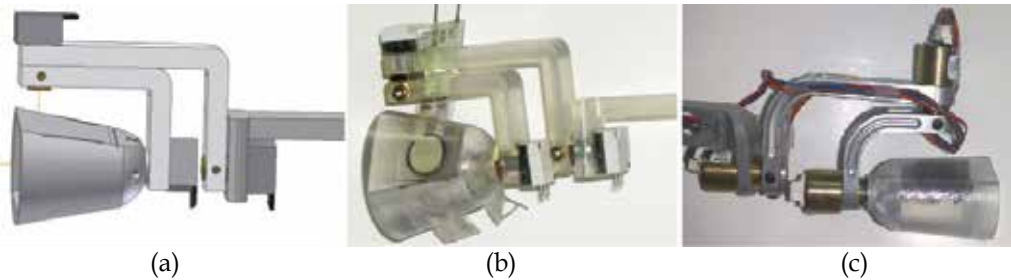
Lateral and frontal view of thimble and sensors: a). CAD. (b). Resine prototype. (c)Aluminium prototype
